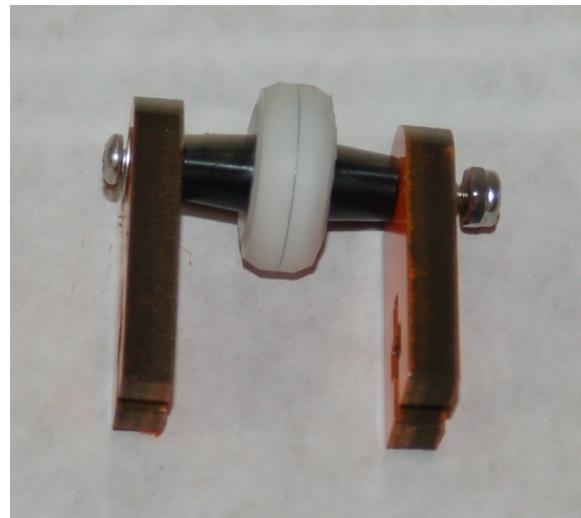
Next, install the remaining Axe Support, a washer and a #6-32 nylon lock nut.
